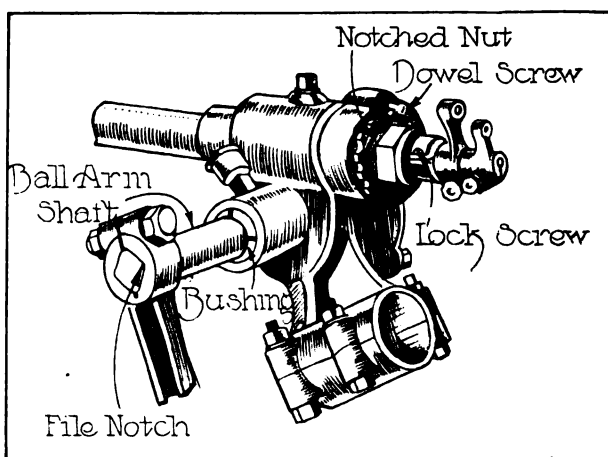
Components Utilized in Eliminating Lost Motion in Steering Gear of Regal Cars.
